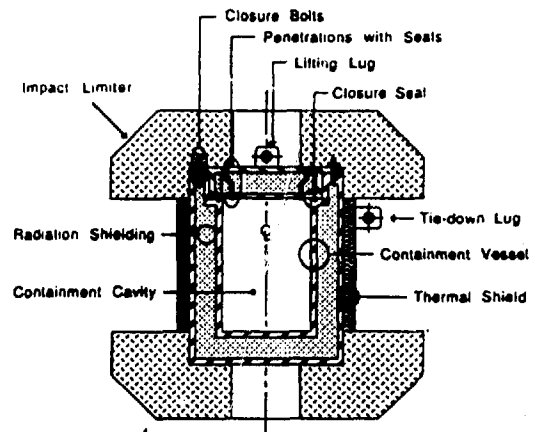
Cross-section through a hypothetical cylindrical shipping package illustrating the major structural components.
